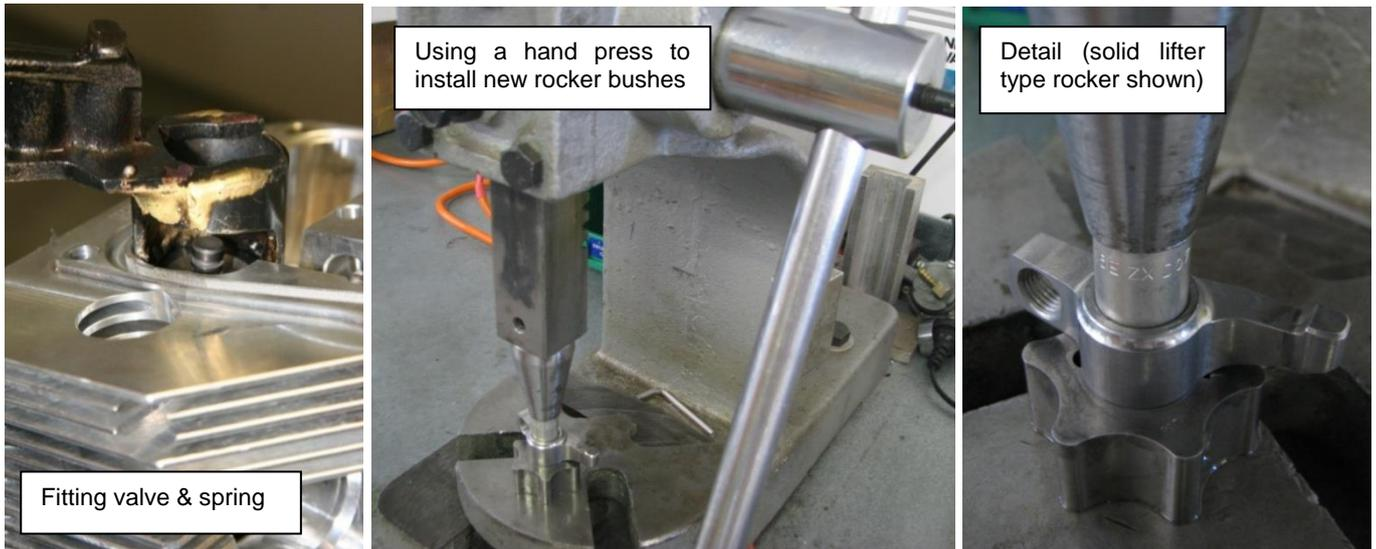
Fitting Valves to Head, Fitting Bushes to Rockers
